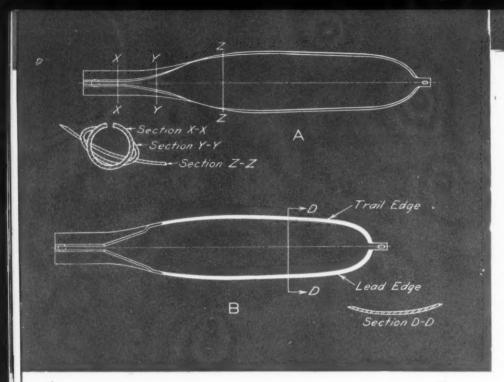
(A) Cross-sectional Contours Produced by the Forming Operation Shown in Fig. 5; (B) Trail and Lead Edges of the Camber Plate are Milled to Flat Surfaces
